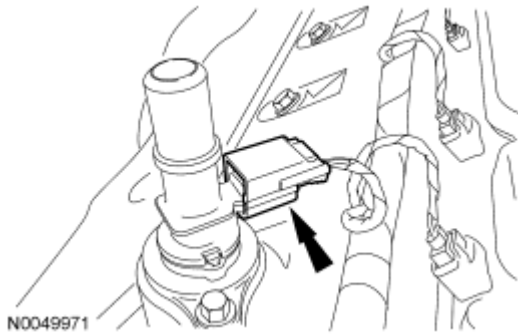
Locating Positive Crankcase Ventilation (PCV) Valve Electrical Connector
